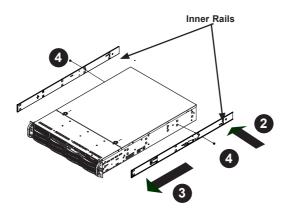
Inner Rails Installed on the Chassis (The chassis above are an example only. Actual chassis may differ slightly)
